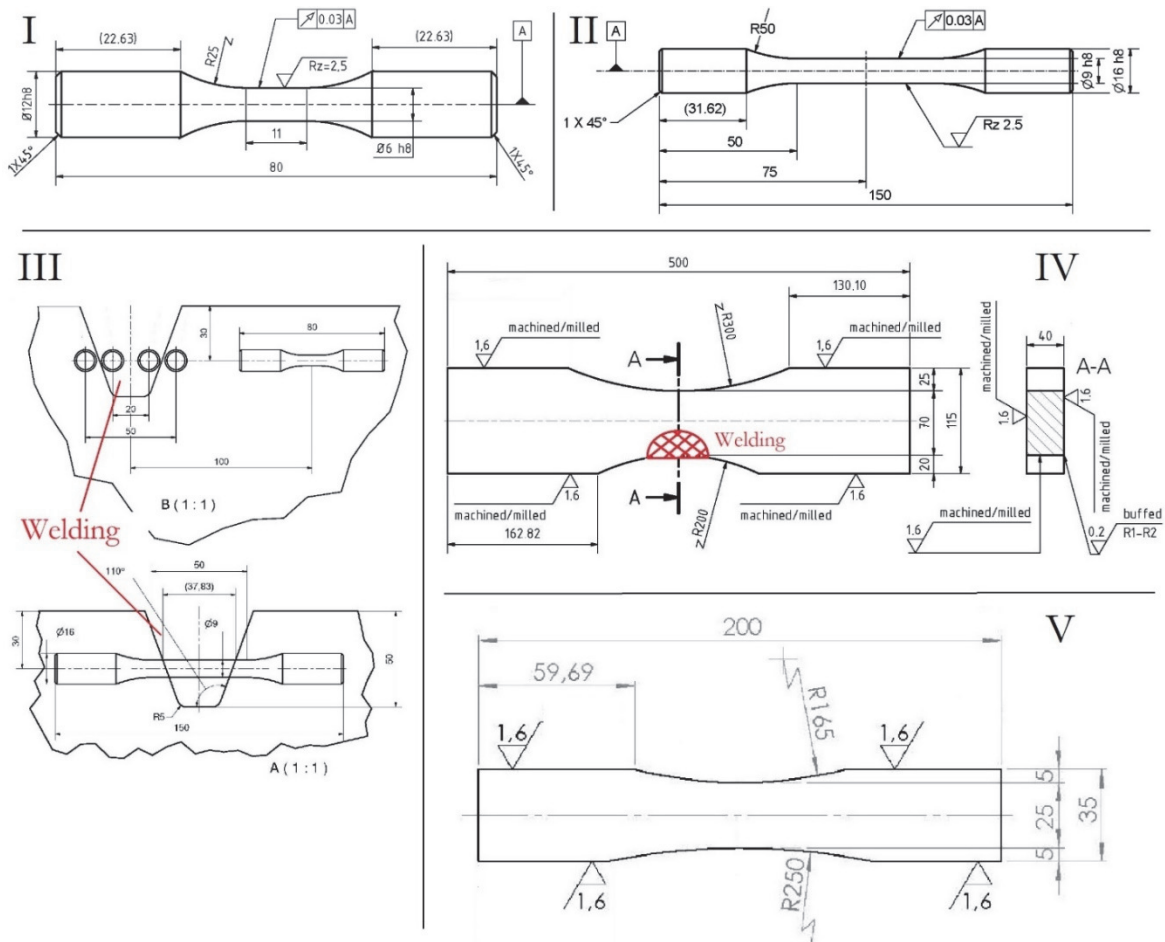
I: axial fatigue specimens used for strain-controlled fatigue tests with $K_t = 1.04$; I: axial fatigue specimens used for strain- and stress-controlled fatigue tests with $K_t = 1.00$ comprising the welding filler, the heat affected zone and the base material called “integral material state”; III: removal position for the axial specimens in the welding filler, the heat affected zone and the base material; IV: bending specimen removed from the cast blocks; V: bending specimen removed from the component.
